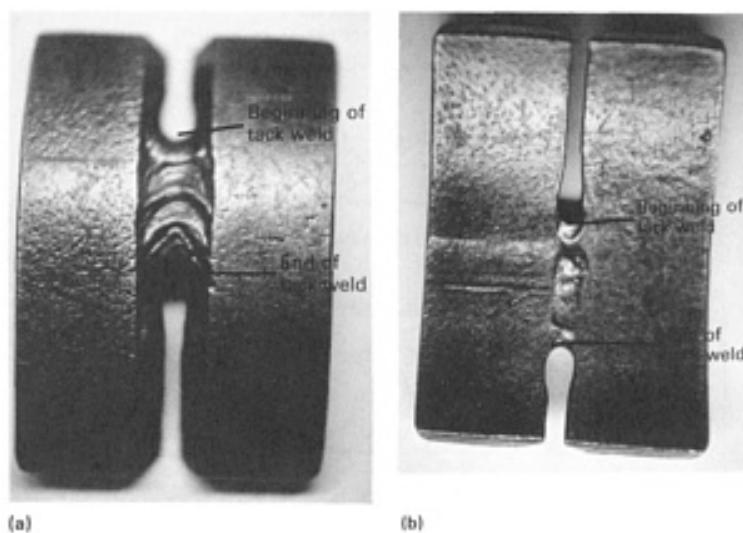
TACK WELD IN API 5L STEEL PIPE. PIPE DIAMETER, 150 MM (6 IN.) WALL THICKNESS, 7 MM (0.28 IN.). (A) OUTSIDE DIAMETER VIEW. (B) INSIDE DIAMETER VIEW
